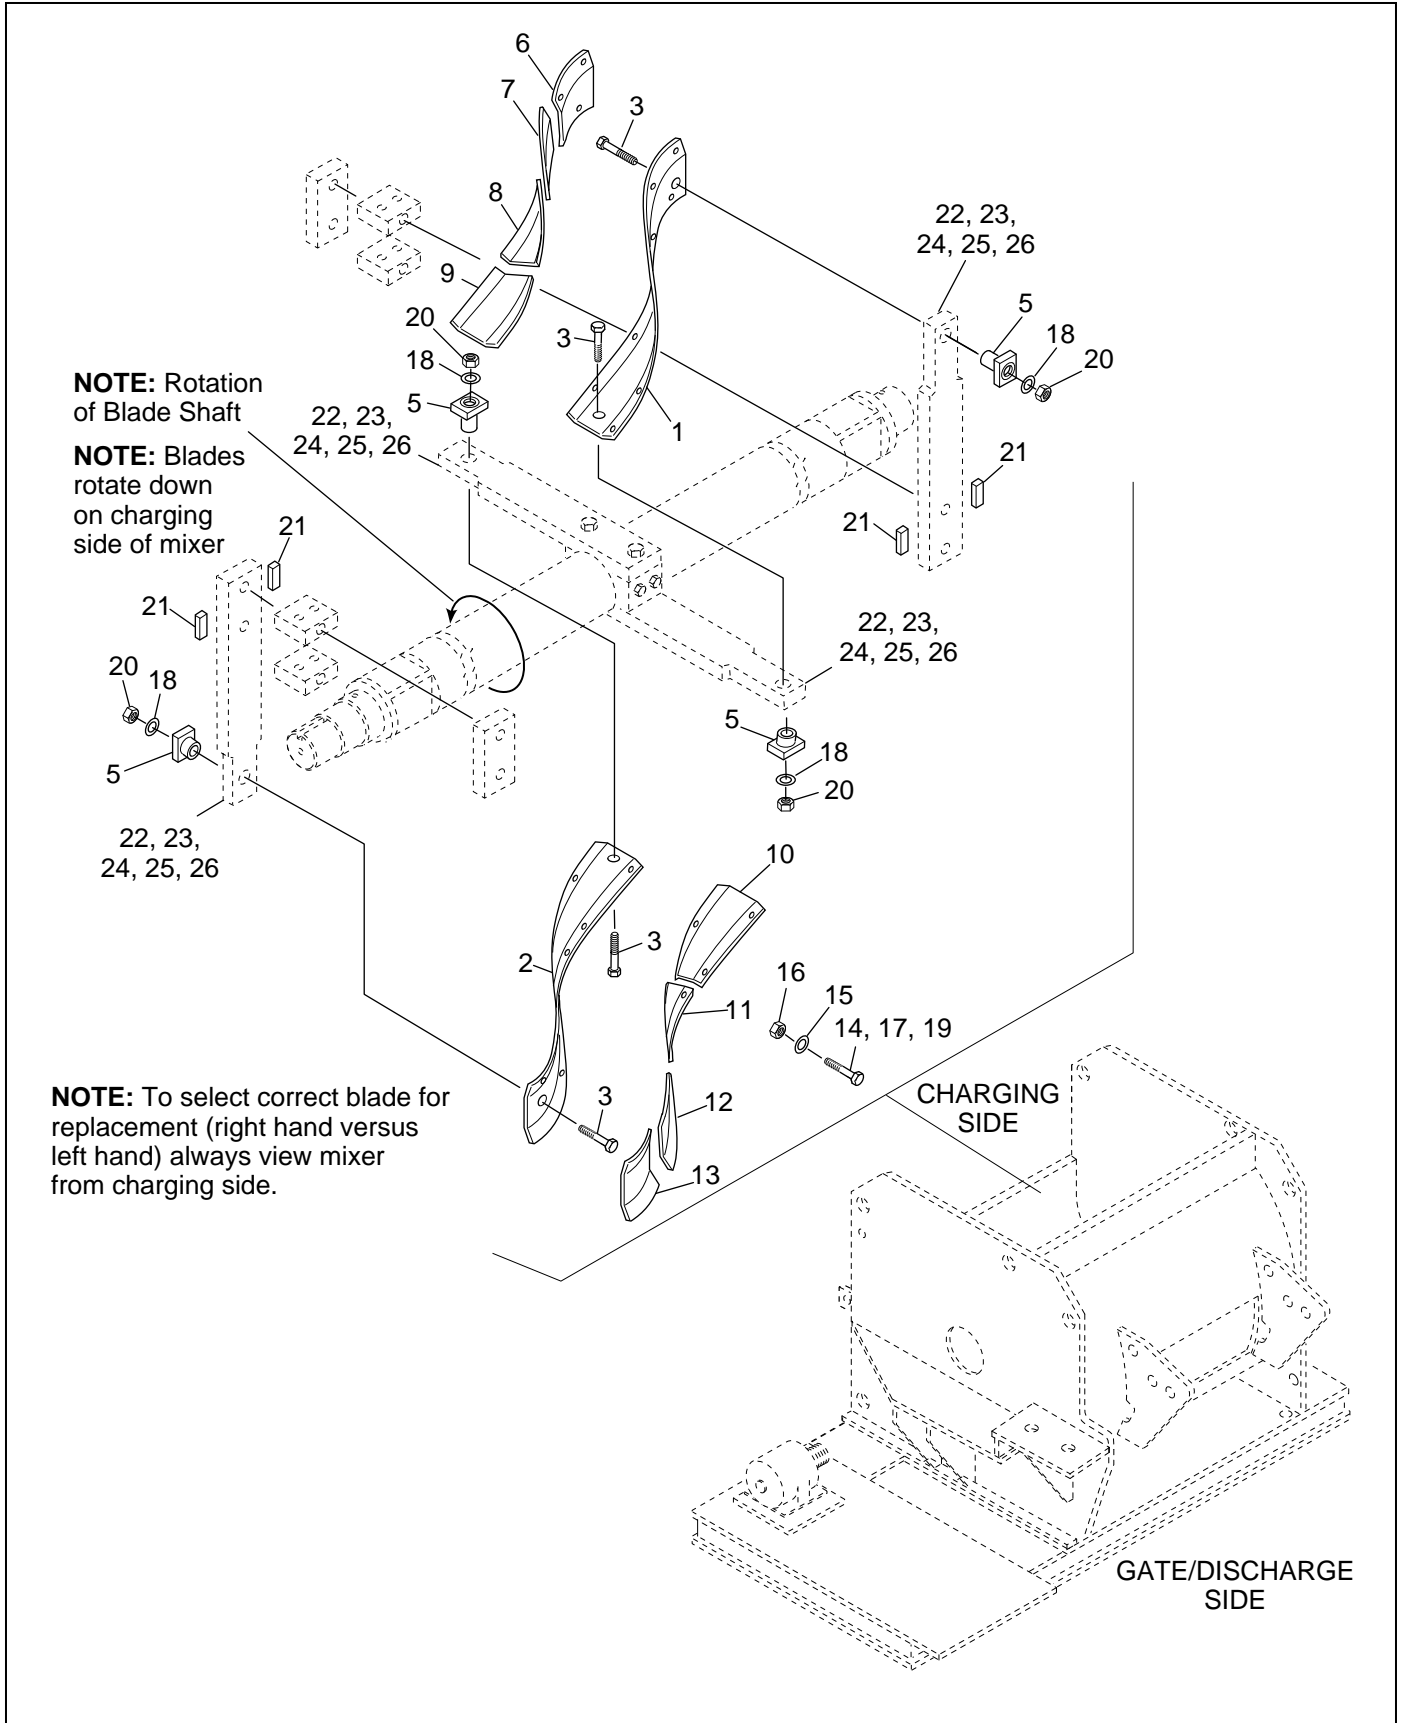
Blade Assembly with Wear Liners (#347528)
